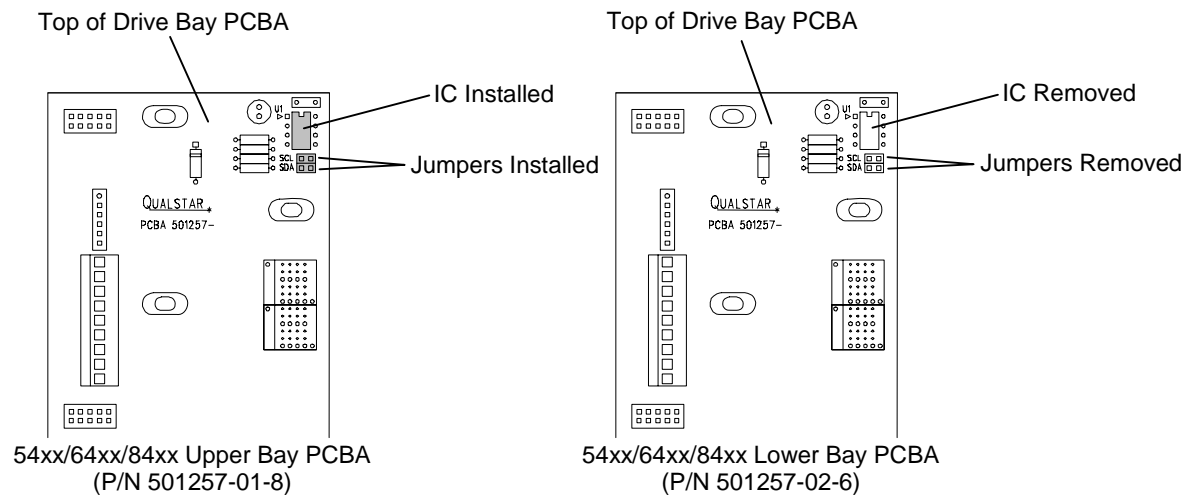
54xx, 64xx and 84xx Model Drive Bay PCBA Jumper and IC Configuration
